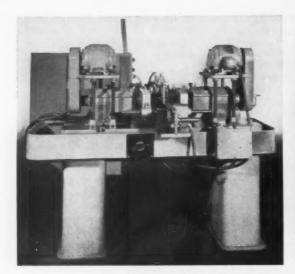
Special tapping machine built by the Ettco Tool & Machine Co., Inc.
